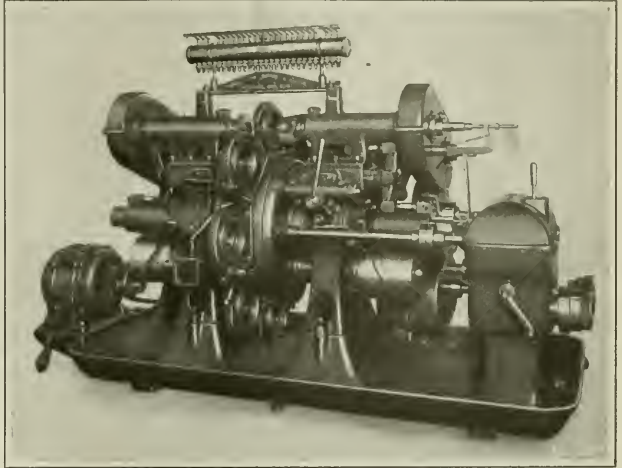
Duplex Multi-spindle Turret Machine made by the Blomquist-Eck Machine Co.
